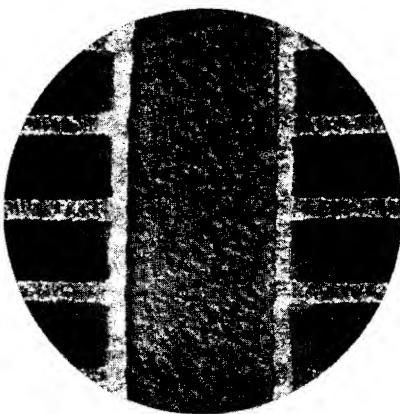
Cross section of a plated-through hole in a six-layer Encapsulayer board. Approximate magnification 30 x.
